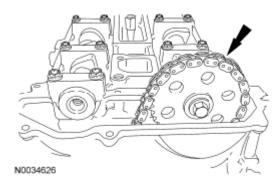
Locating Intake Camshaft Drive Gear And Bolt
